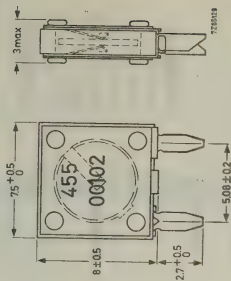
Version for printed-wiring boards, with holes of 1.3 mm
